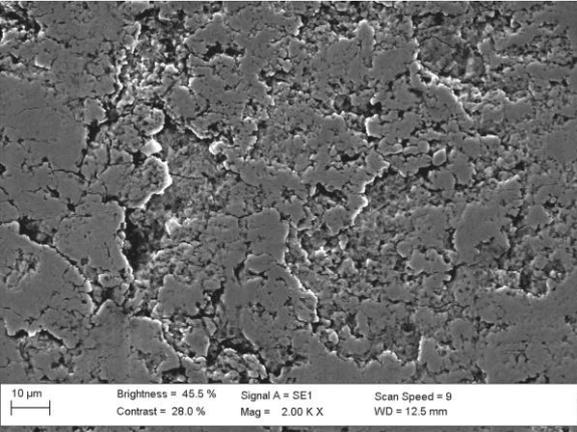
Example of surface fretting fatigue damage of axle seat under press fit with microcracks and short fatigue cracks
